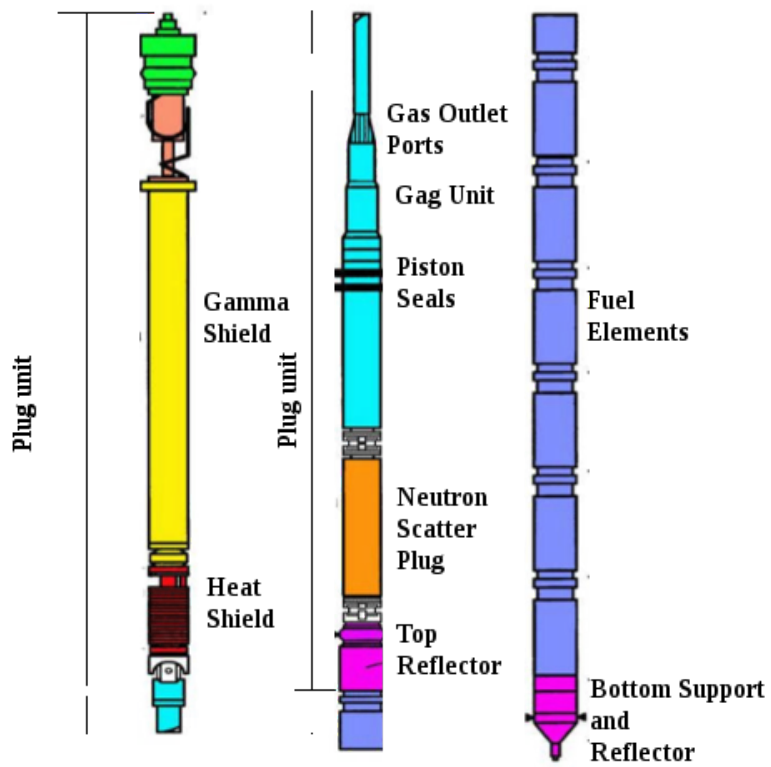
Schematics of the AGR fuel assembly. Adapted from ref. [8].
